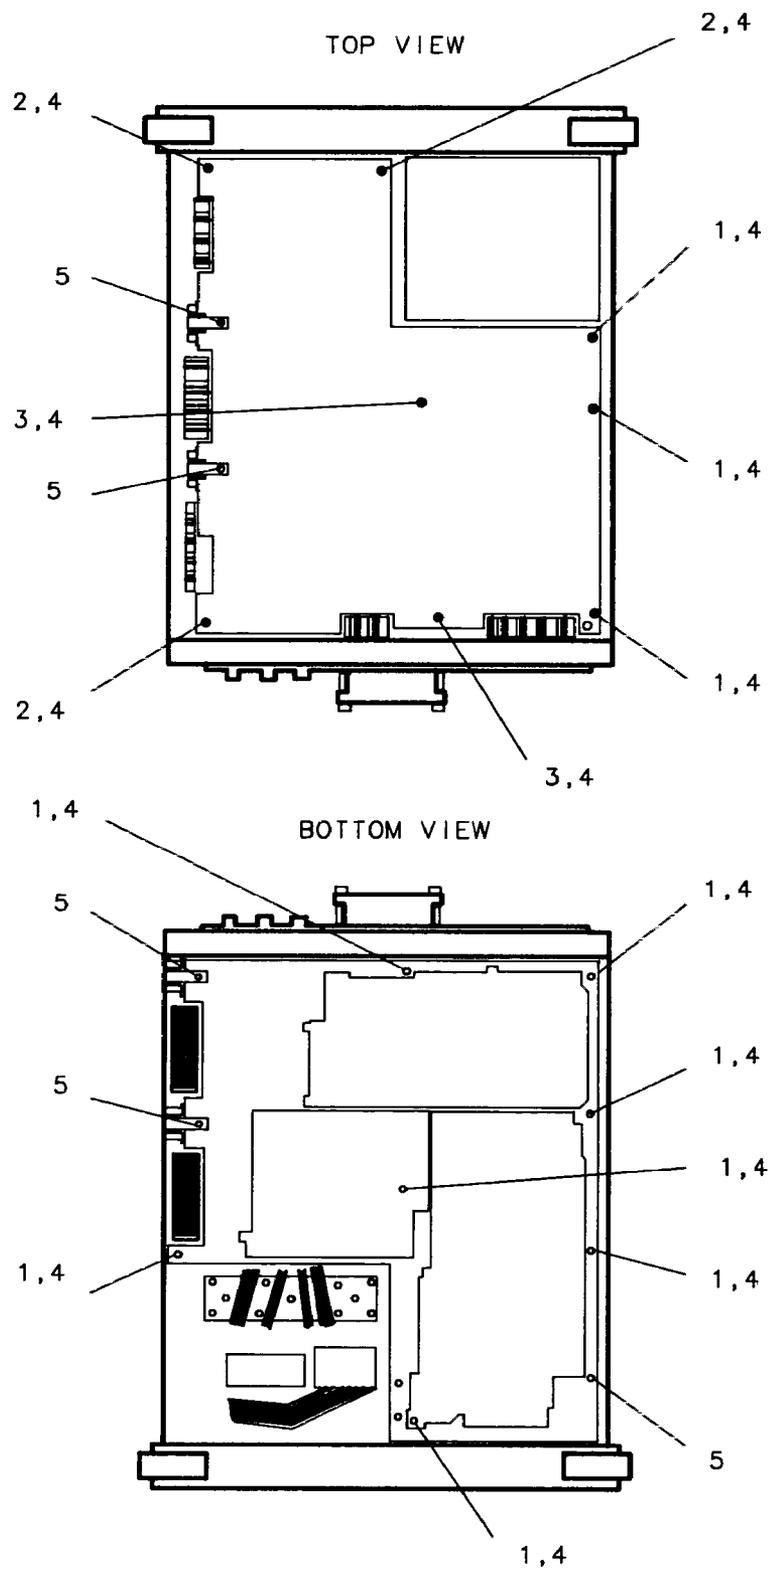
Parts Identification, Assembly Mounting (1 of 2)
